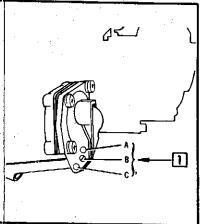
### FIG. C FLOAT ASSEMBLY DETAIL VIEW
